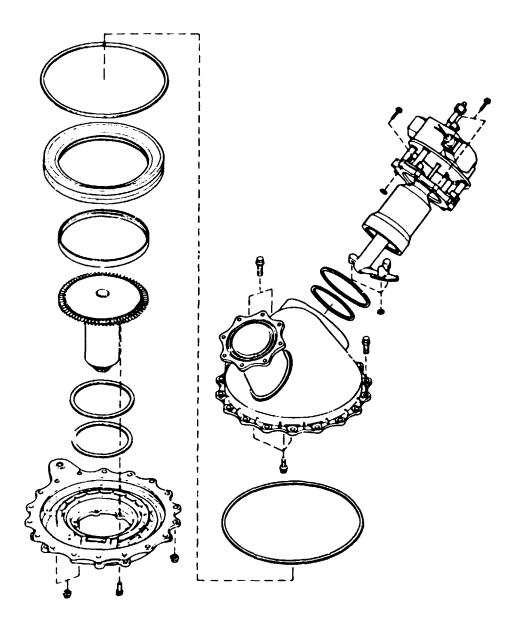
SRB APU turbine and GG assembly - exploded parts.
